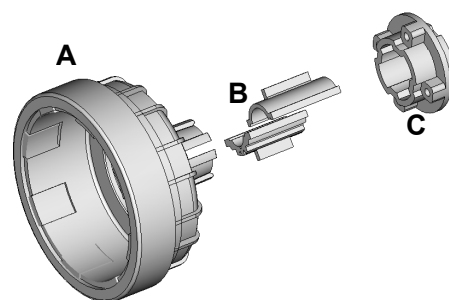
E – Drive magnet assembly - sockets - collar scheme
